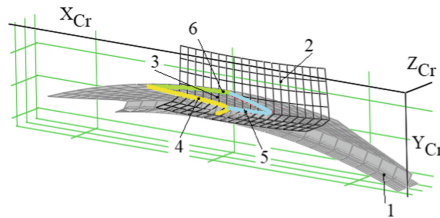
Contact spot of the cutter tooth and the crankshaft neck.
